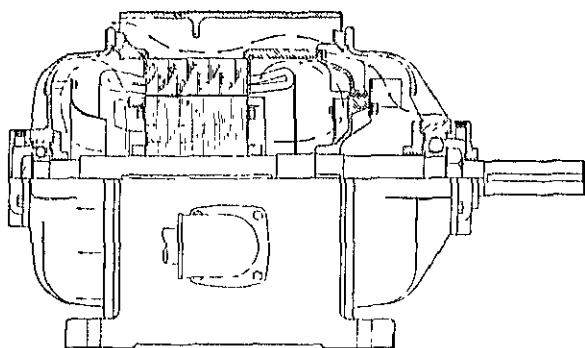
Sectional assembly of totally enclosed squirrel-cage motor with ball bearings.
